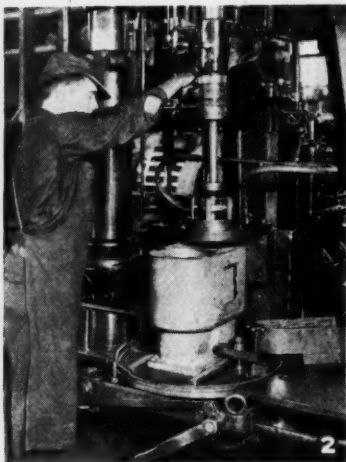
Cylinders are honed in this machine after boring. Fig. 3—Crankcase in fixture for boring and reaming, showing tools. Fig. 4—Grinding the "pins" on crankshaft.
